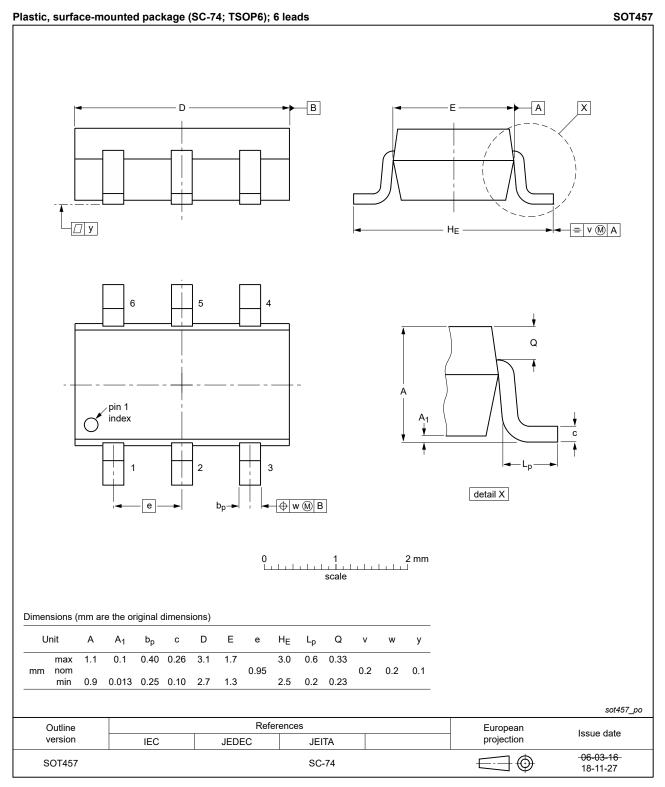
Package outline SOT457 (SC-74; TSOP6)
